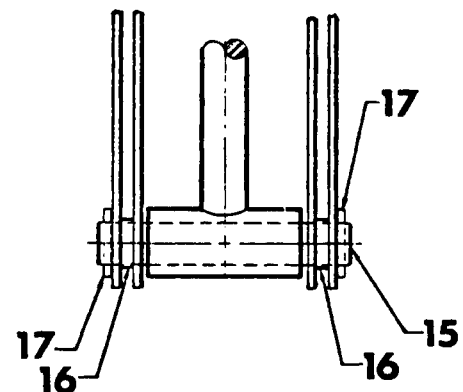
SCISSOR ASSEMBLY (RT25G)
